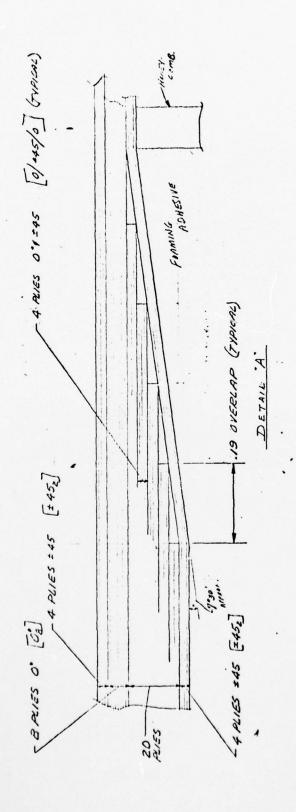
& AXIAL LOAD SPECIMEN, DETAIL A
